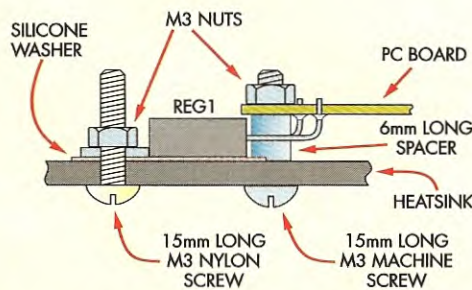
regulator REG1 can be mounted underneath the PC board and attached to a heatsink, as shown here. Note that its metal tab must be isolated from the heatsink using a TO-220 silicone washer and a nylon screw.
